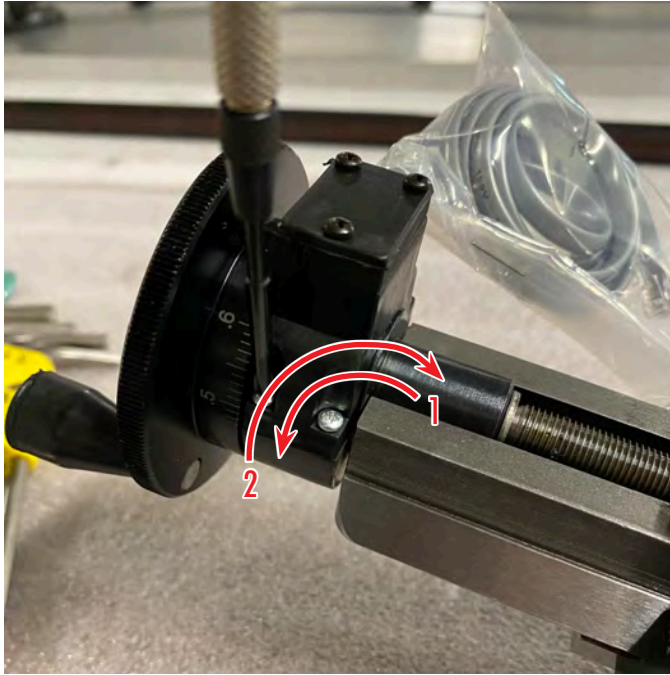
NOTE: The housing is plastic. Do not overtighten the screws or you will strip the threads out of the housing. Just tighten them until they are snug.
